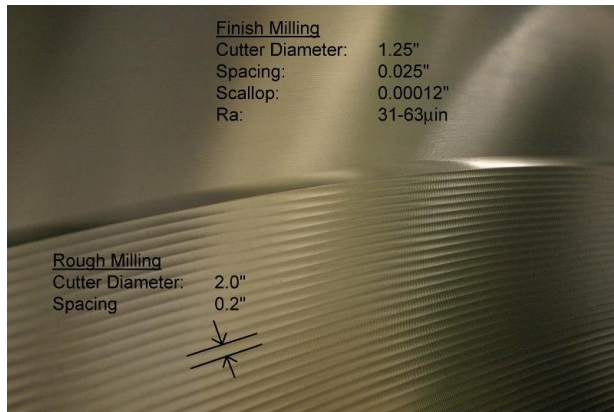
, Rough milled and finish milled surfaces as they appear after milling.
